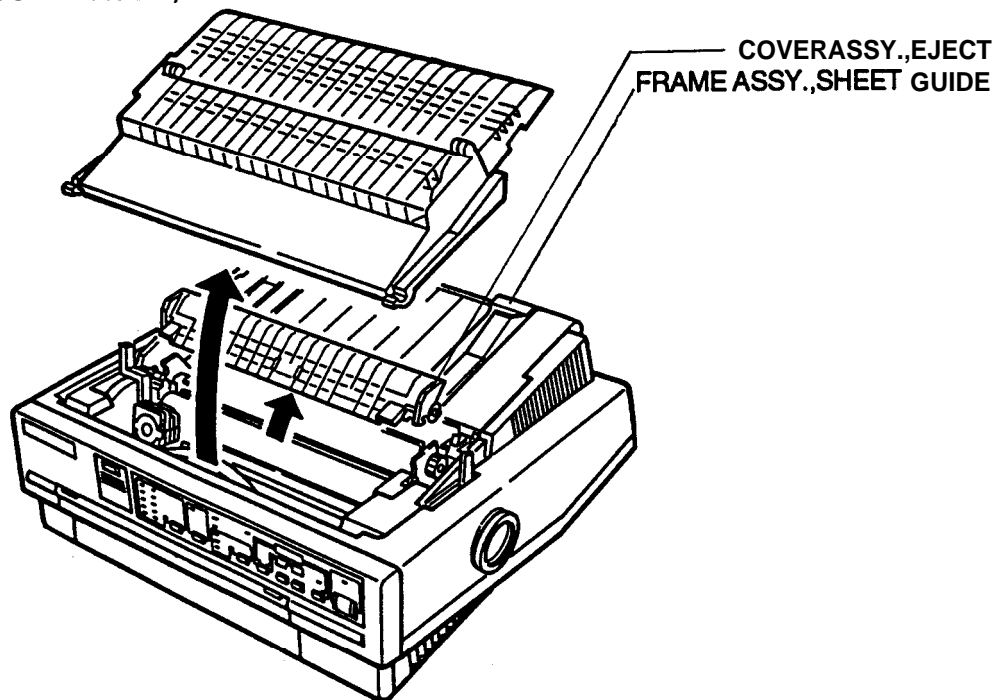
Removing the FRAME ASSY., SHEET GUIDE and the COVER ASSY., EJECT
